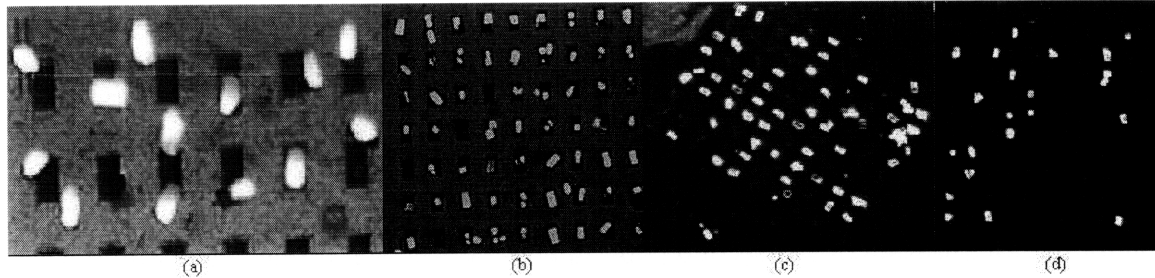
Experimental results from assembly of rectangular recesses and rectangular device pills. Picture (a) shows a solid Pattern-1, picture (b) shows a Pattern-30, picture (c) shows a Pattern-18, and picture (d) shows Pattern-10.
